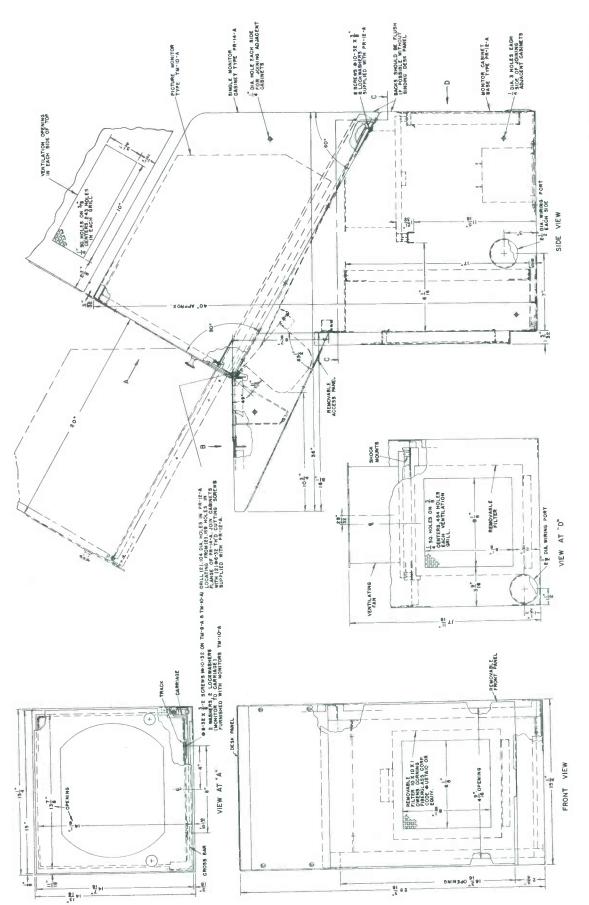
A Cabinets, Types PR-12-A, PR-13-A, PR-14-A, PR-15-A, Outline and Clearances Drawing
